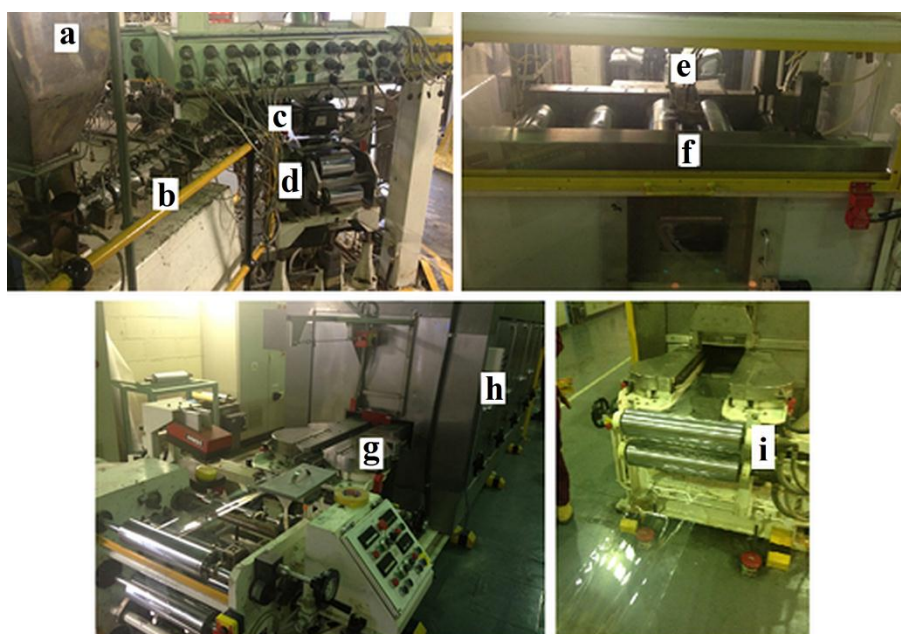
The semi-technical industrial-scale film line, with: a) hopper; b) extrusion melt pipe; c) die; d) casting drum; e) infrared heater; f) forward draw unit; g) sideways draw unit; h) stenter oven; and i) film winding unit.
